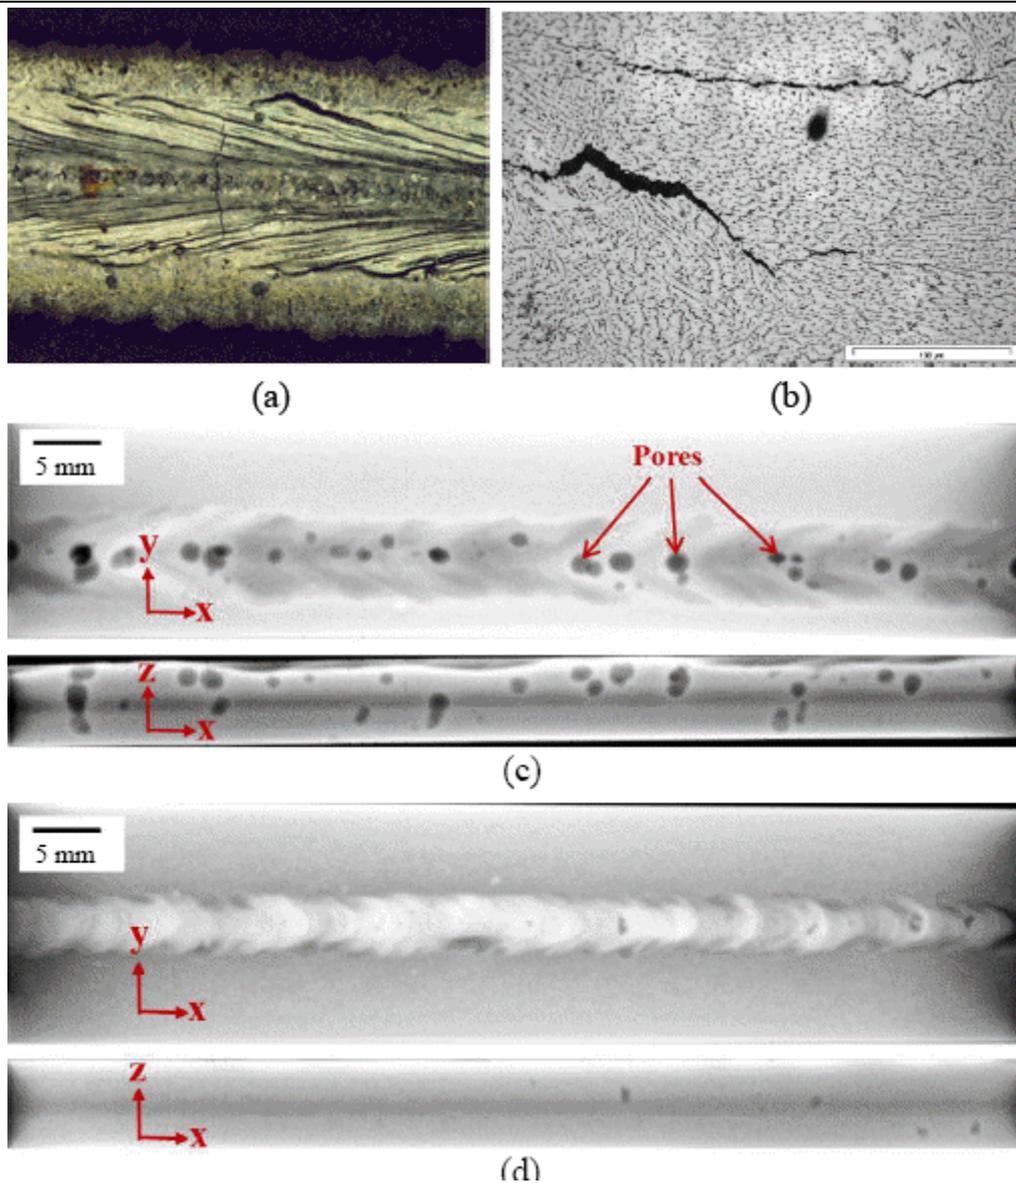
Defects of welds: a) – transverse cracks on the upper roller of the Al7075 sample, welded by the laser-arc method; b) – a typical crack in the HAZ of the Al7075 sample welded by the laser method; c) – radiograph showing the degree of porosity in the Al7075-T651 sample welded by the laser-arc method; d) – radiograph of seams obtained by laser welding with cold wire 4043.
